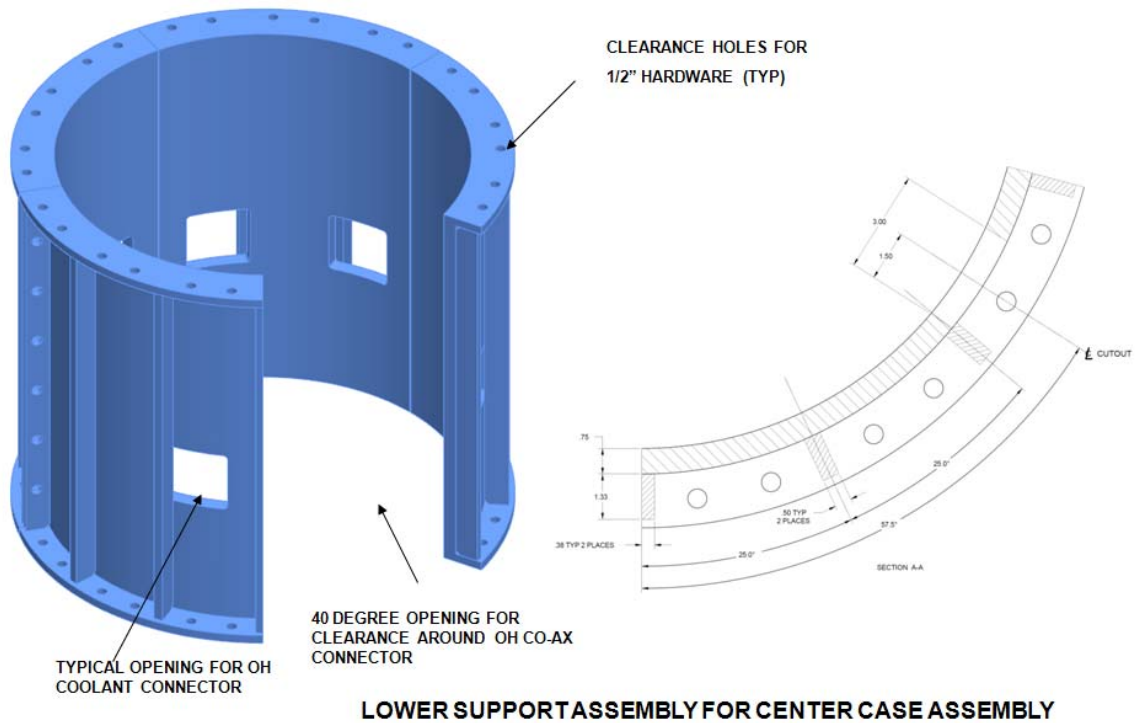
Lower Support Skirt (FDR vintage with 24 1/2 inch bolts at the lower flange)
